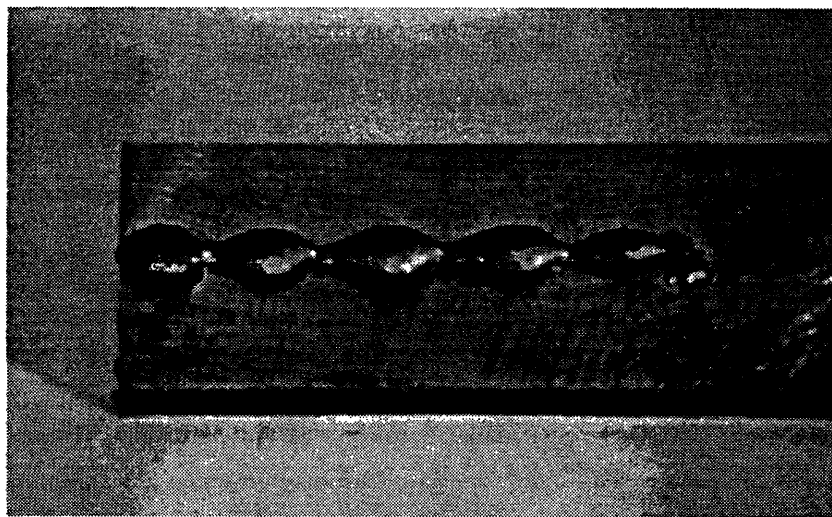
Bead Deposited on Workpiece of Cross Section Dimensions 5mm x 5.08 cm
